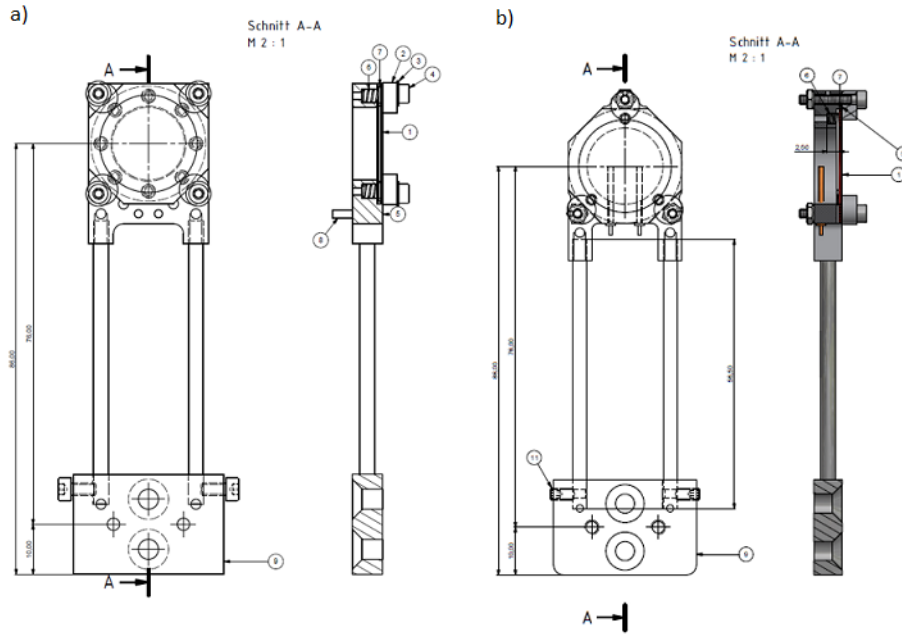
a): Engineering drawing of the first design of the PIPS mount. b) Second design.
